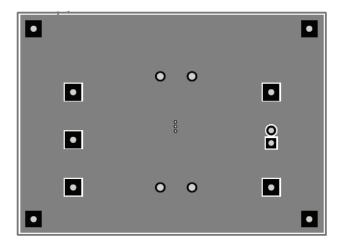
AAT4681IDE Evaluation Board Bottom Side Layout
